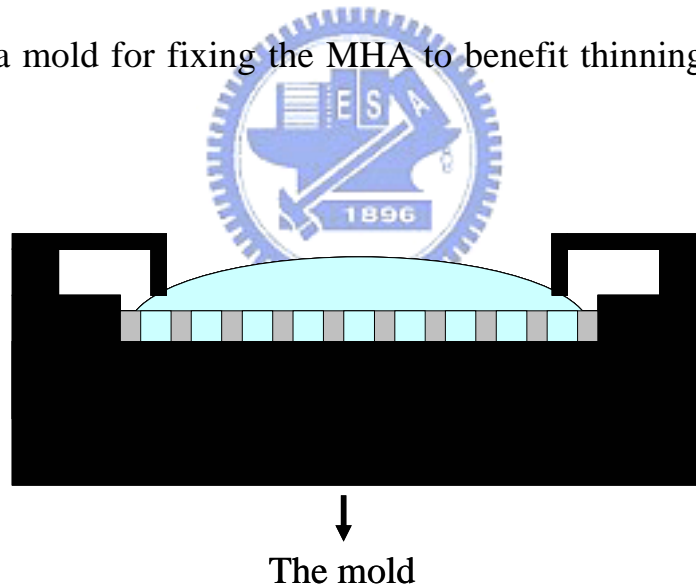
(b) Procedure 2 of fabricating the MHA which holes filled with UV-gel. Devising a mold for fixing the MHA.
